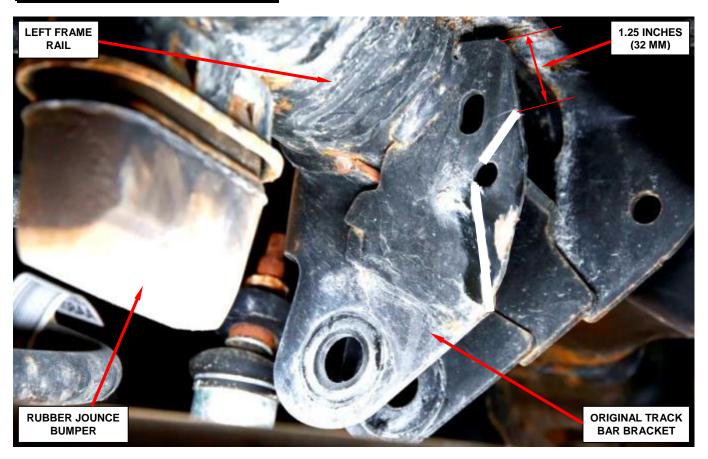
Mark Frame and Cut Bracket with a Cut-Off Wheel
